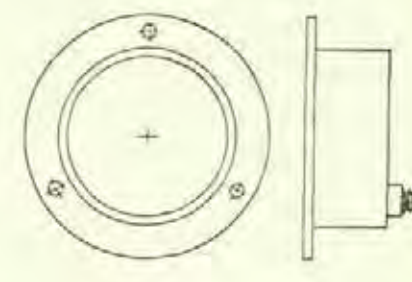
FLUSH MOUNTING GAUGE WITH BACK CONNECTION
